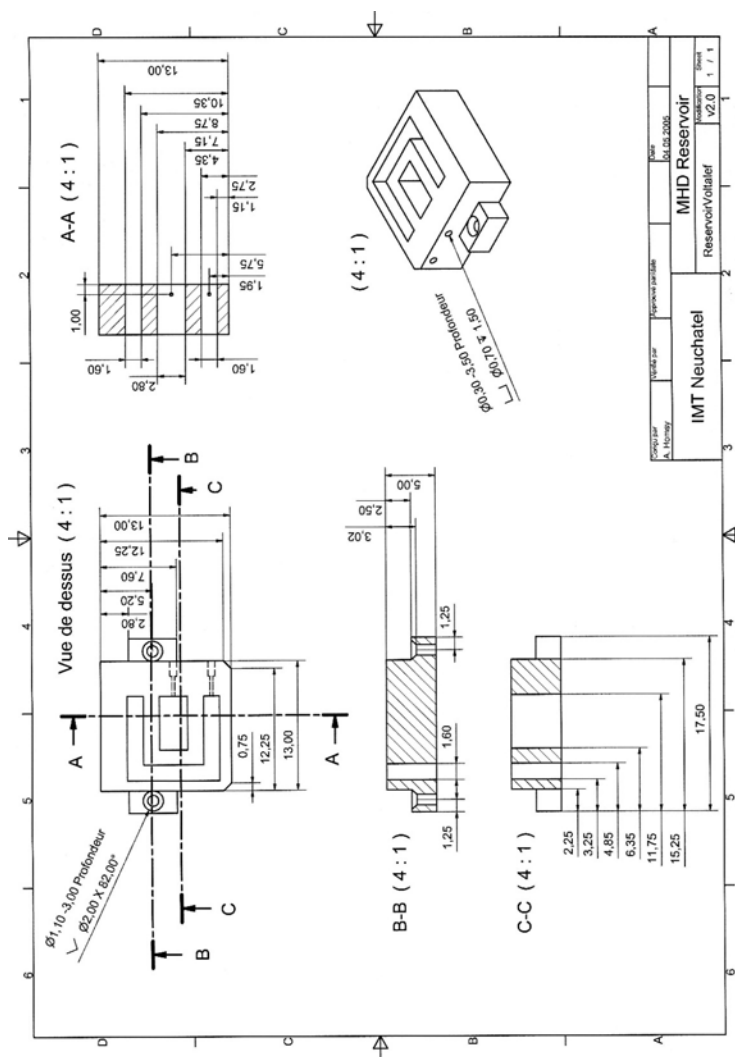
Technical drawing of the top part of holder with detailed dimensions and views.
